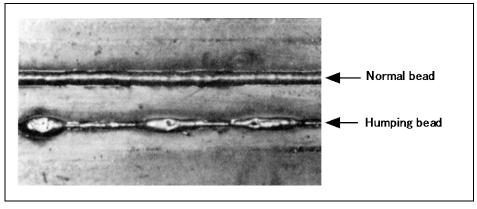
A typical humping bead caused by an excessively fast welding speed (100cm/min or higher) in use of a solid wire
